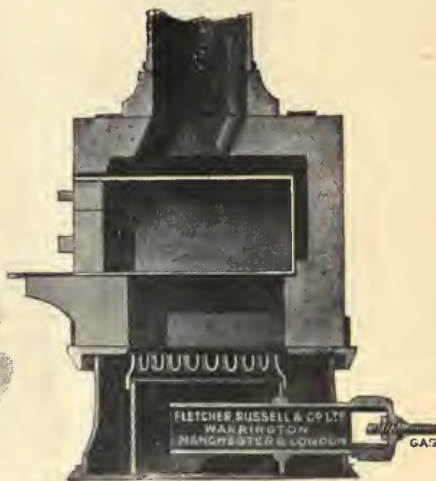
INTERNAL ARRANGEMENT OF GAS MUFFLE FURNACE.
